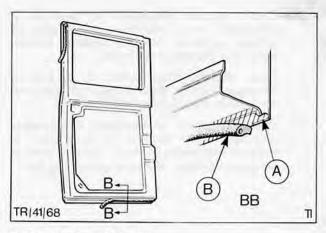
Weatherstrip to door A – Adhesive B – Weatherstrip
